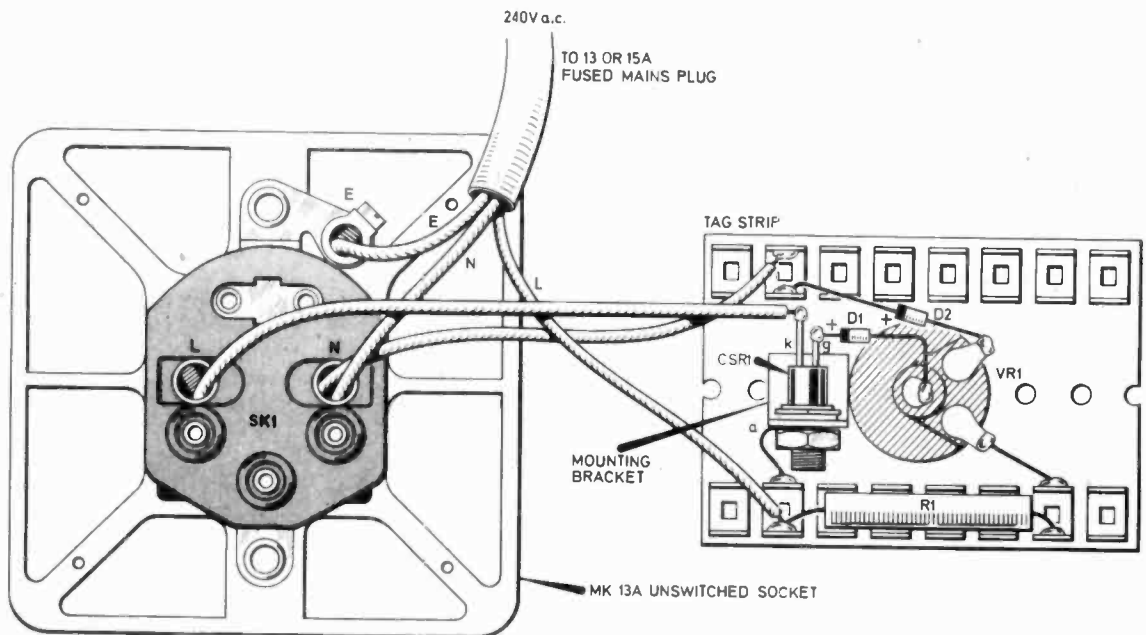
Complete layout and wiring of the Drill Speed Controller.
